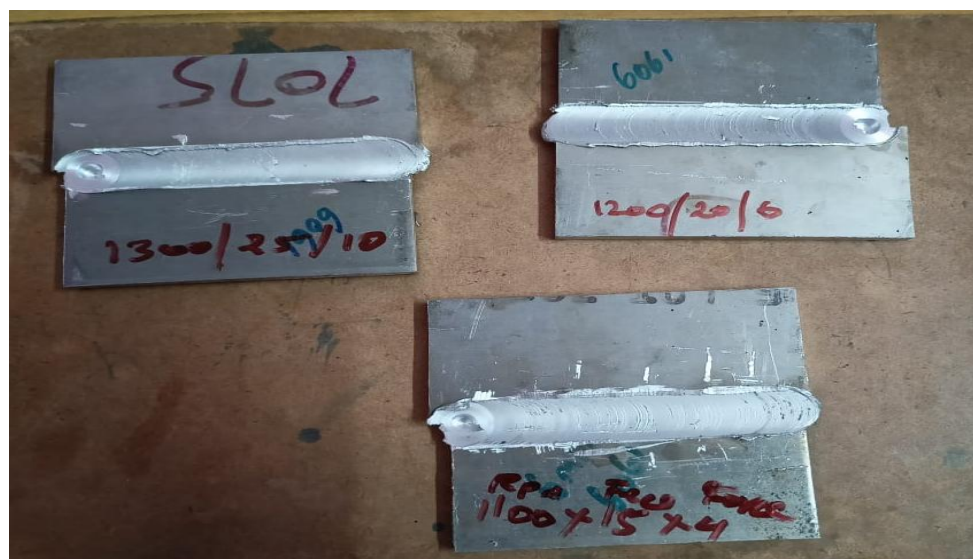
Welding of dissimilar Aluminium alloys
